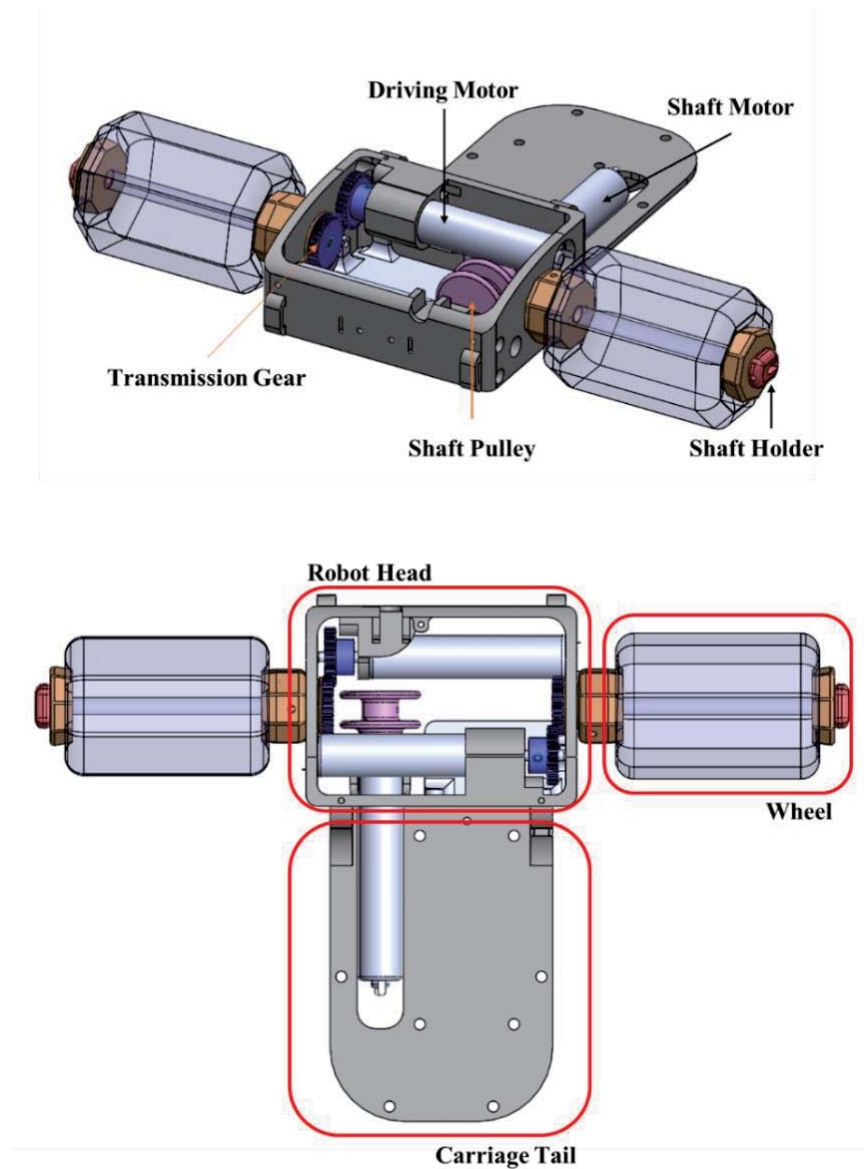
Overall view of the wheel deformation and torque transmission mechanisms.
